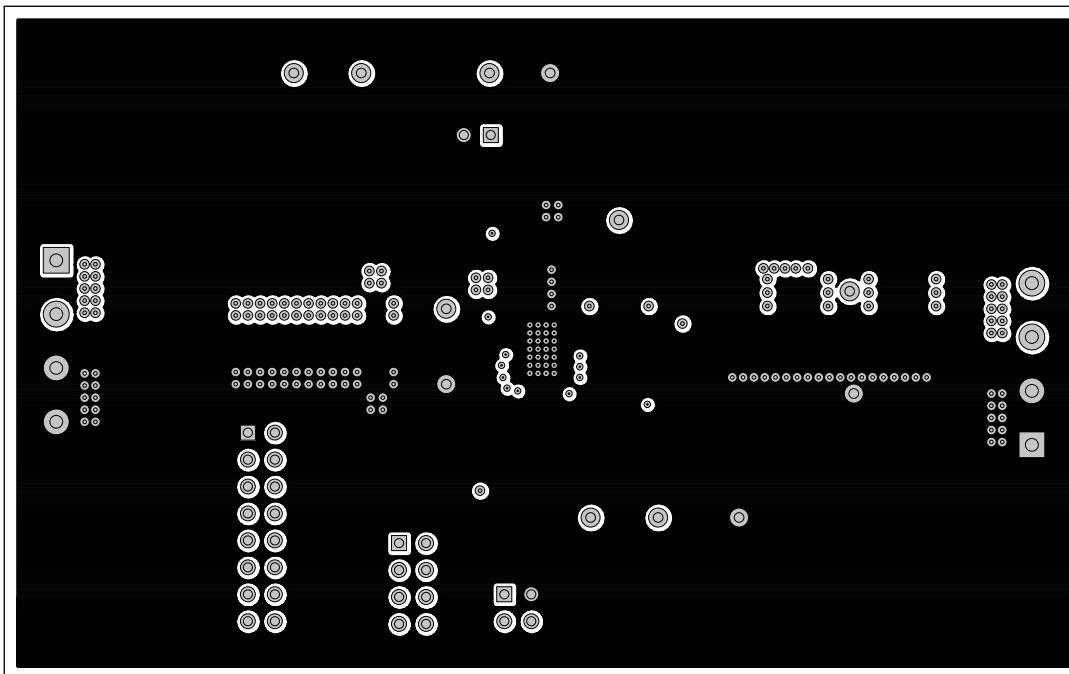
TPS53353EVM-744 Bottom Assembly Drawing
